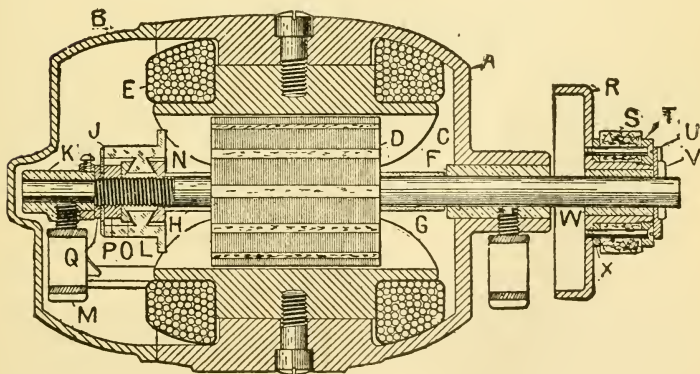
Sectional diagram of the Apple igniting dynamo. The parts shown are: A, cast iron body containing the moving parts; B, hinged lid of the body; C, one pole piece of one of the field magnets; F, brass bearing of the armature spindle; G and H, fibre tubes surrounding the spindle; K, brass spider supporting the spindle; L, commutator; M, wick feed oil cup; N, beveled nut supporting the commutator; O, P, Q, supports of the commutator; R, the driving disc; S, lever friction pinion. This machine can generate a direct current at 8 volts at a speed of between 1000 and 1200 revolutions per minute. It is provided with a simple centrifugal governor that automatically interrupts the driving connections when a certain speed has been exceeded.
